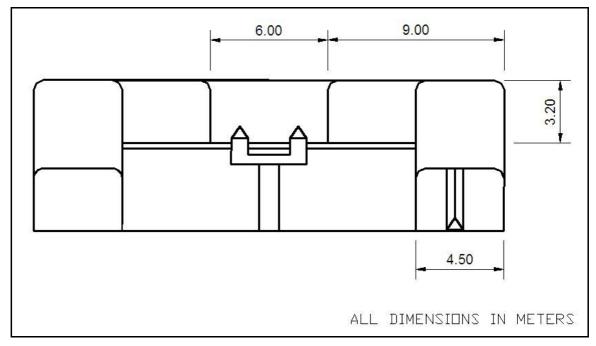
Front View On/off Switch Cover Dimensions
